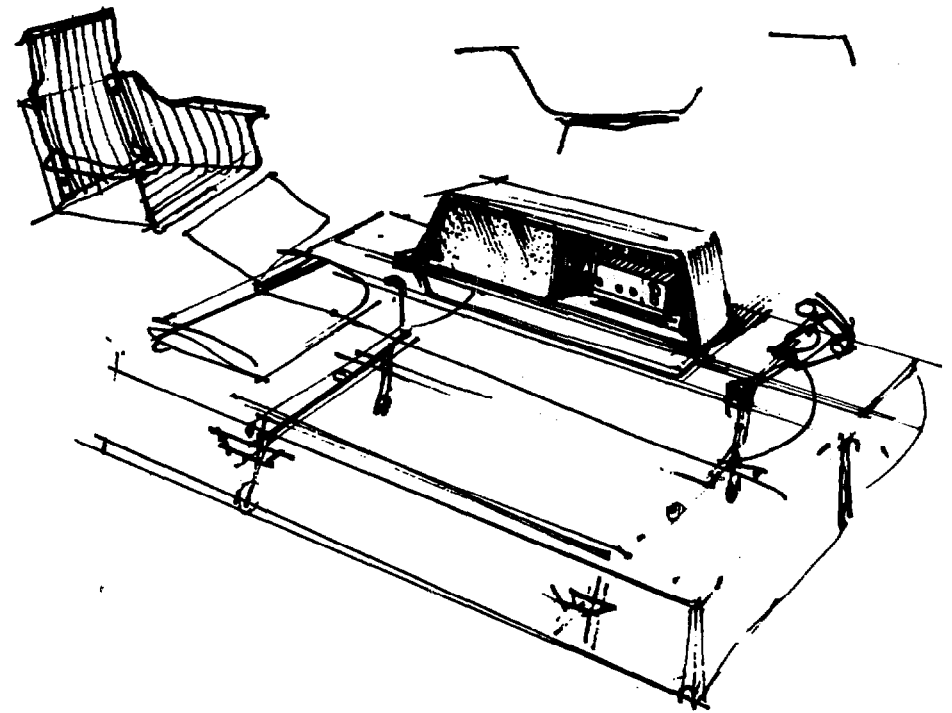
Tony Chan uses "exploded perspective" to visualize how the parts of this mechanism will be assembled. His ability to draw freehand enables him to clarify his thinking on this consideration quickly.
